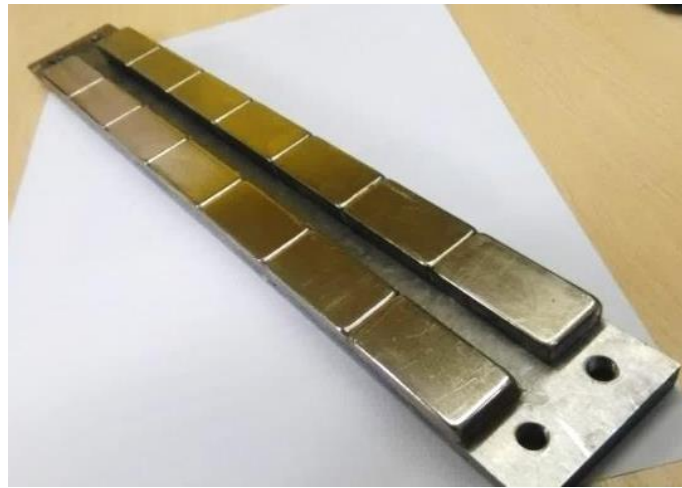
Photo of the magnet track assembly (Iron shoe strip not fitted)
